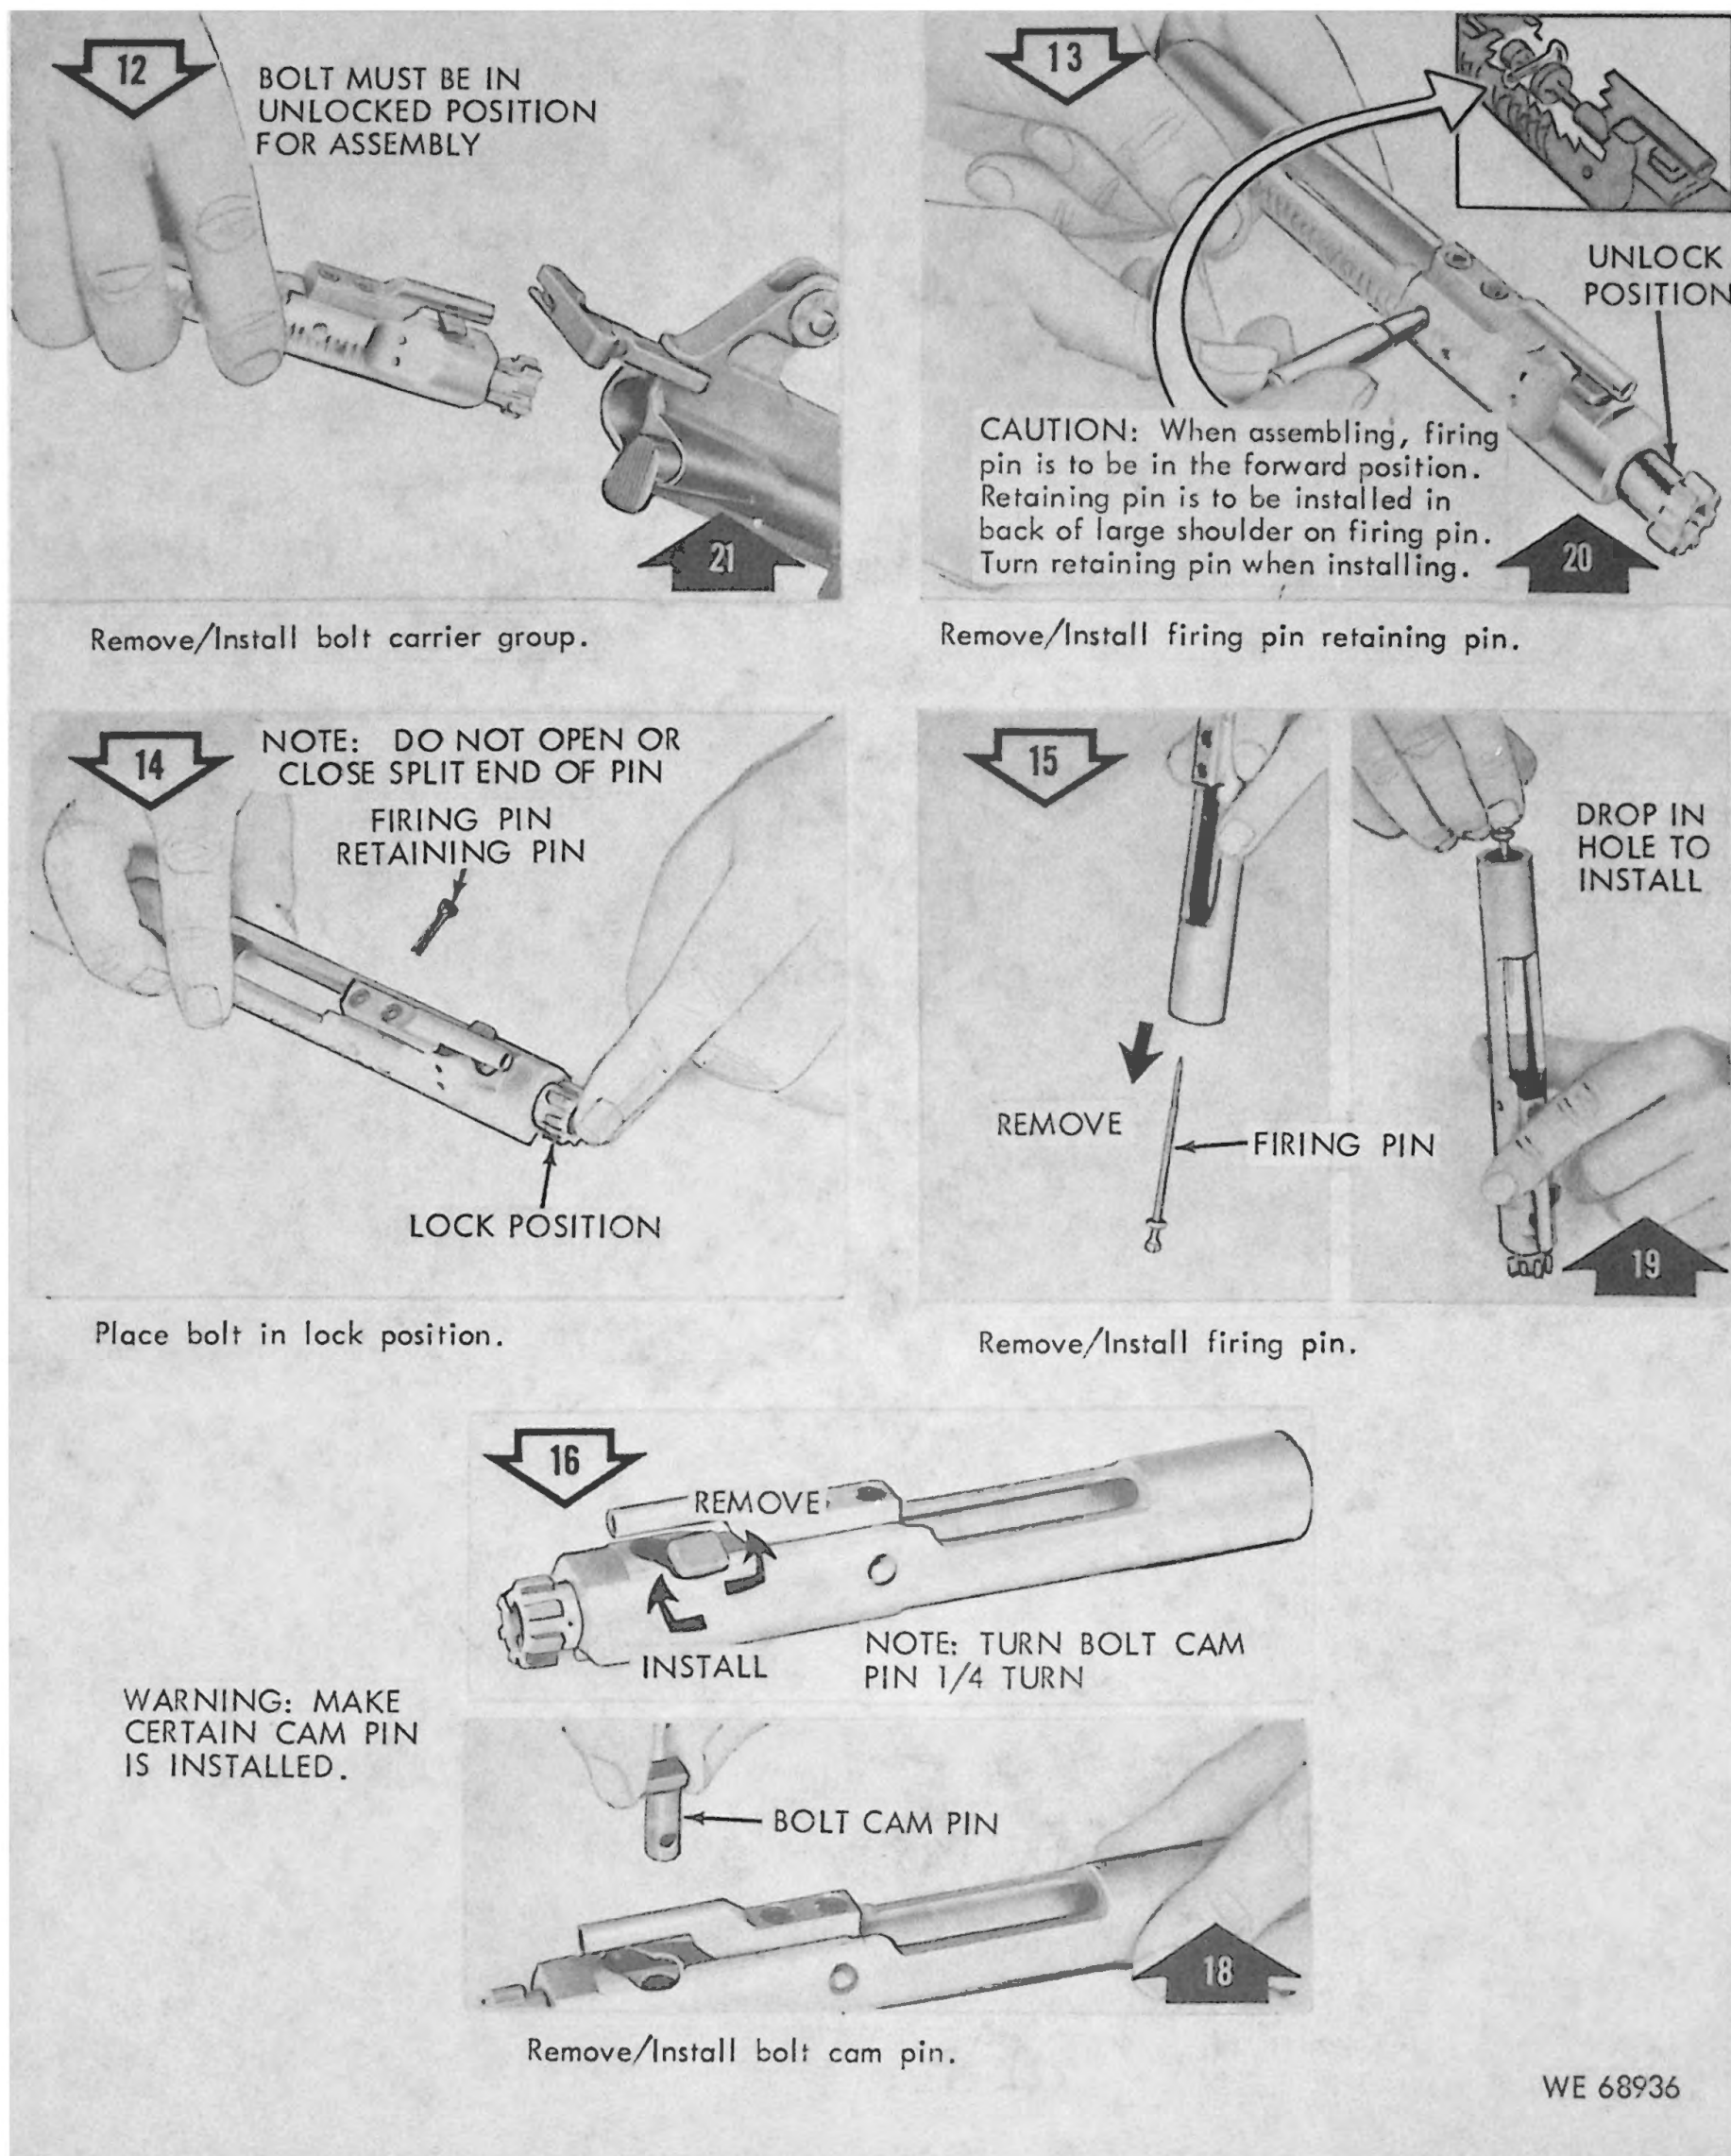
Disassembly/assembly of rifle. (3 of 8)
